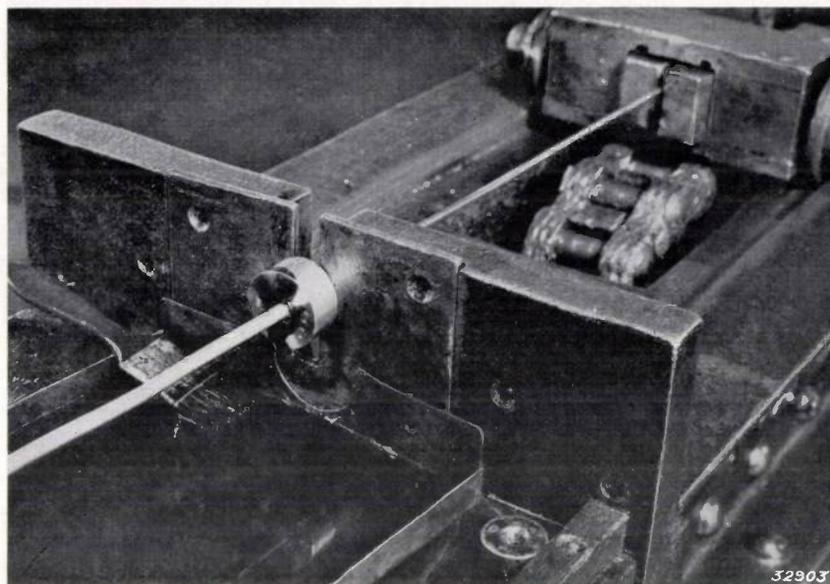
A die with a "hard cemented carbide" core in use. It may clearly be seen in the photograph, that the wire has a smaller diameter after passing through the die.
